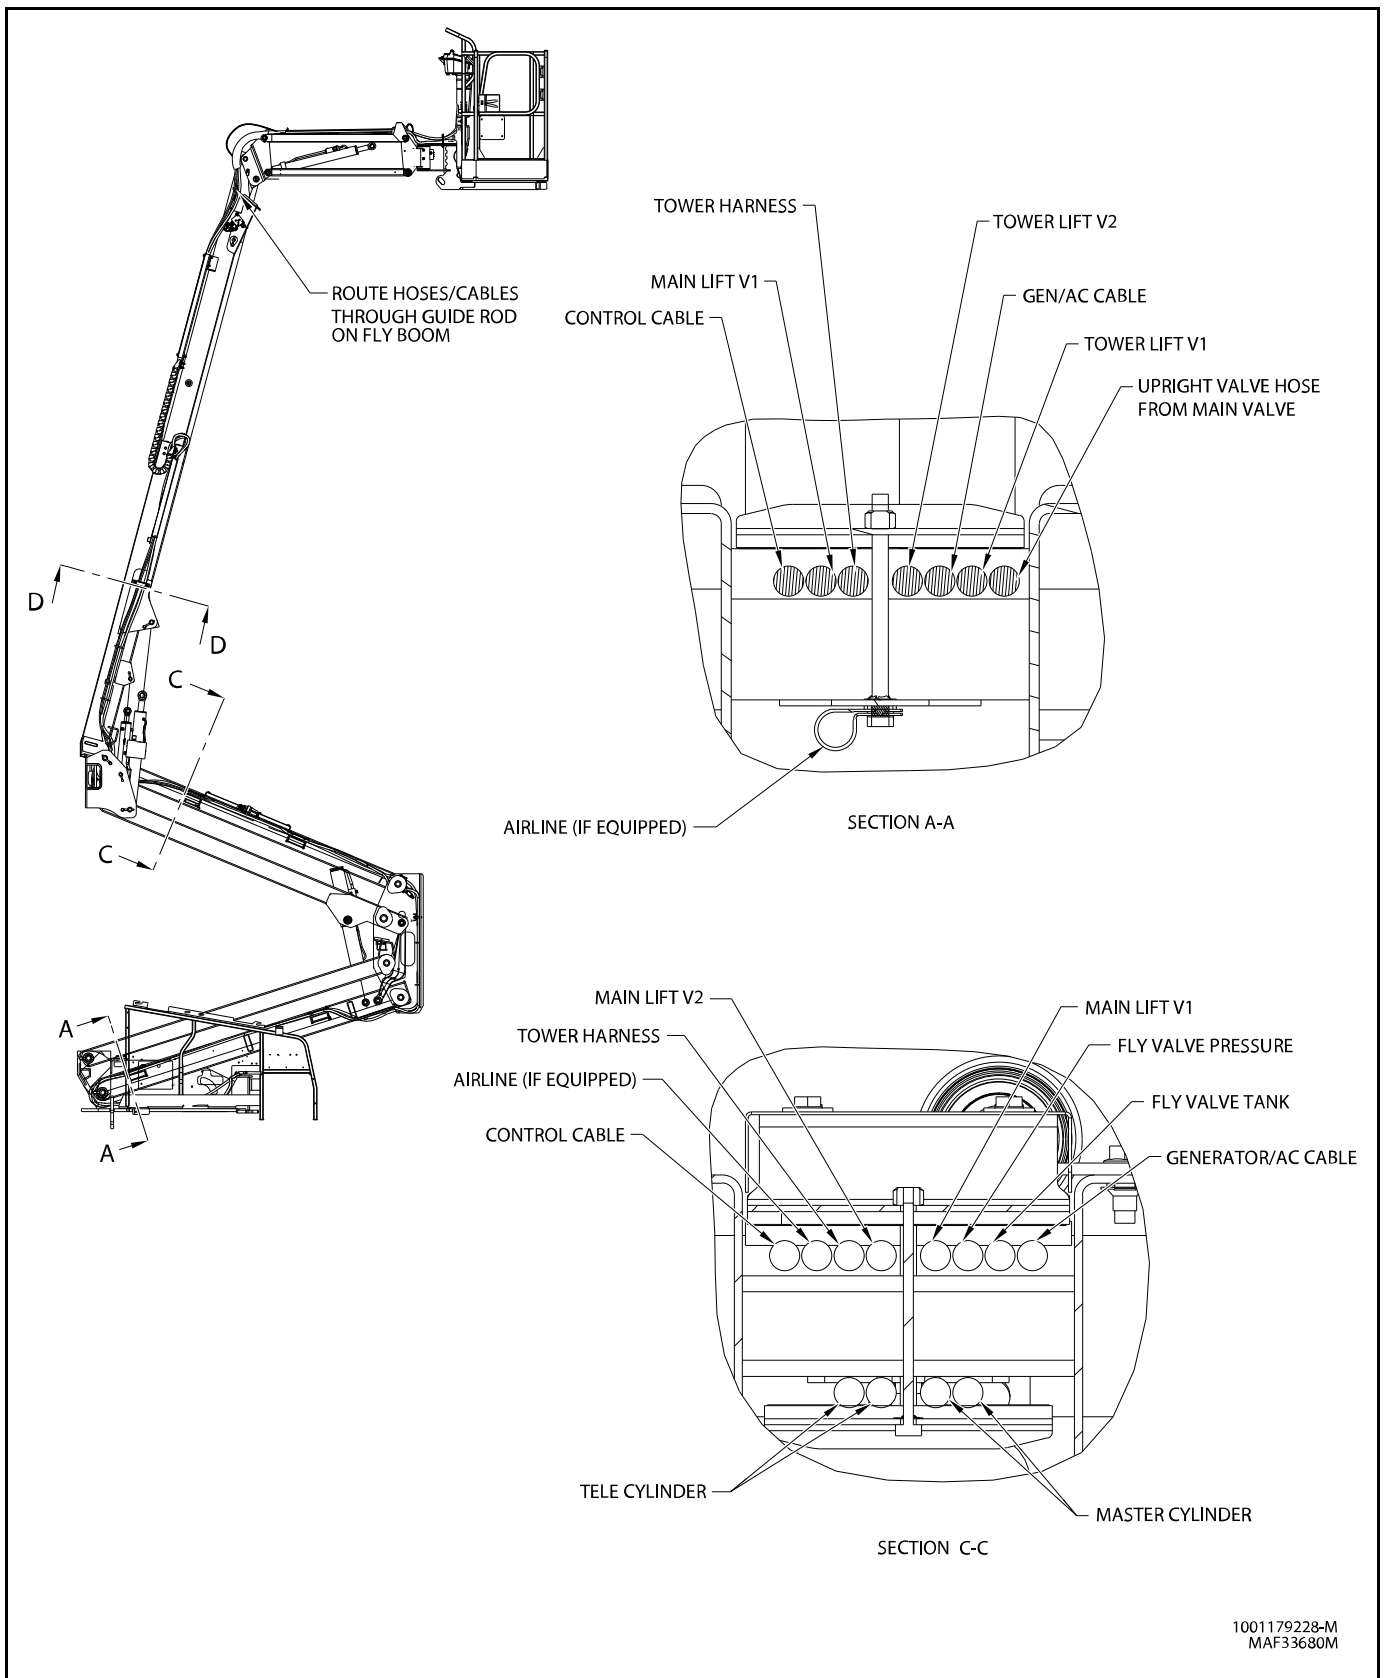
Cables and Clamps Installation - Sheet 1 of 8
